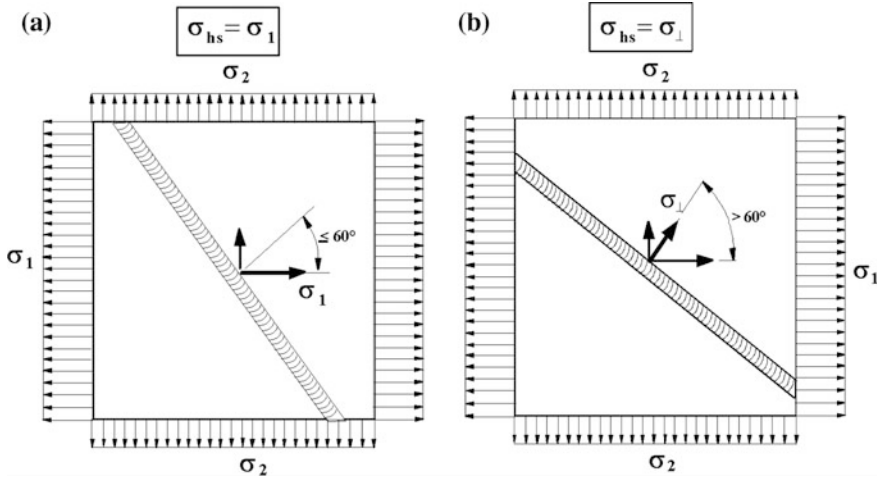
Biaxial stresses at weld toe, principle stress within (a) and without (b) an angle of 60° perpendicular to the weld
